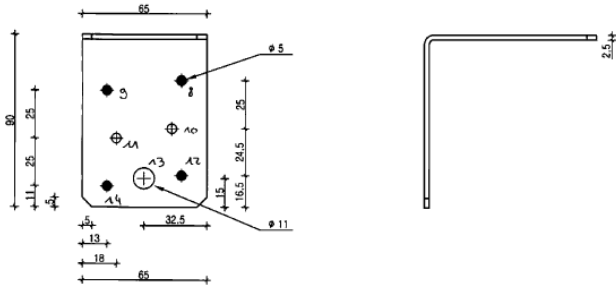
Dimensions of angle bracket 90x90x65x2,5
